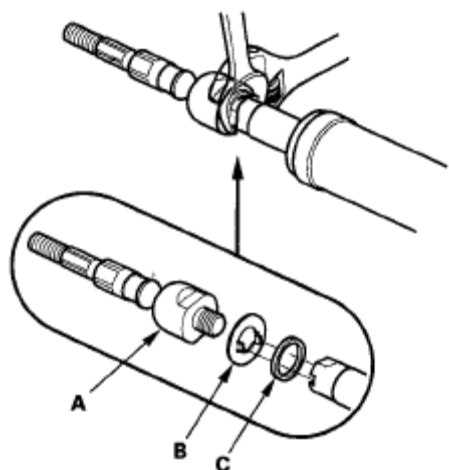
Identifying Rack Shaft On Pinion Shaft
